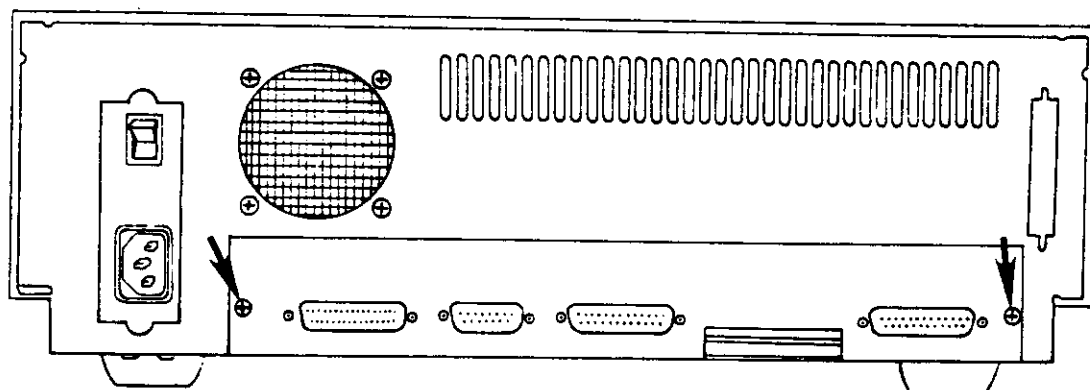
Motherboard Screw Locations (Rear Panel)
